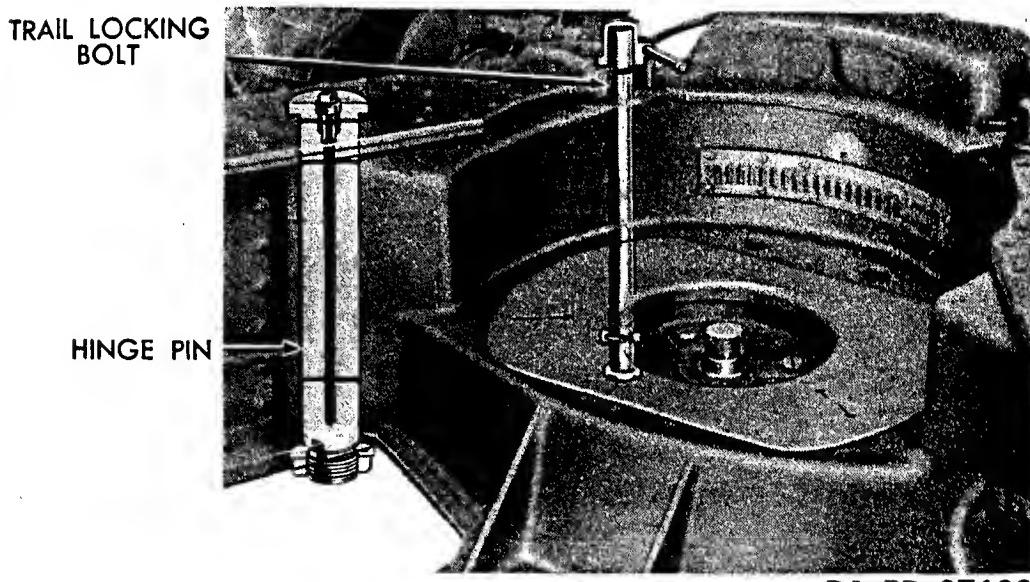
Cut-away of bottom carriage showing trail hinge pin and trail locking bolt
